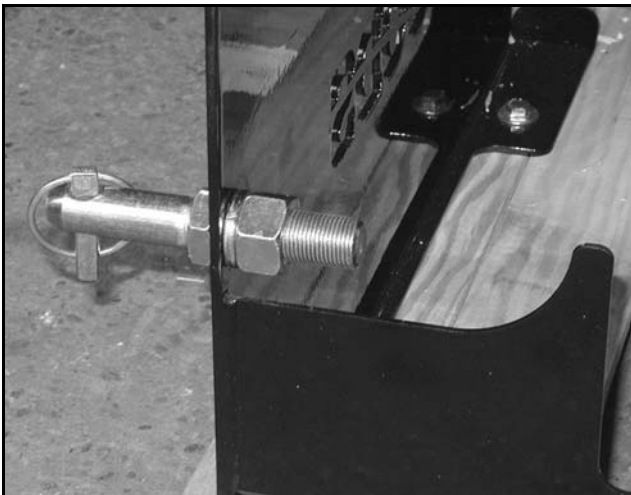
3-Point Hitch Pin Installed, Left Pin Shown
